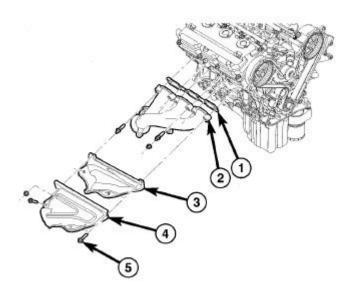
Right Exhaust Manifold Assembly Courtesy of CHRYSLER LLC
